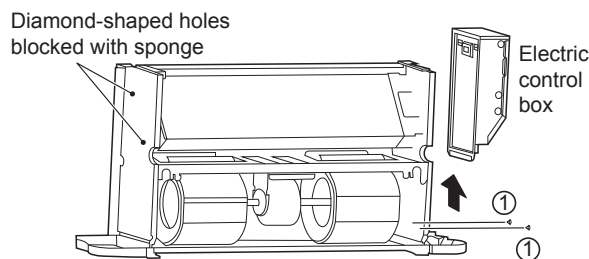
Removing the electric control box and blocking the diamond-shaped holes
